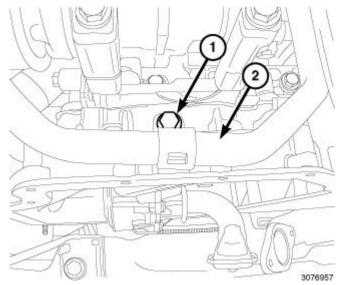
Coolant Tube & Bolt Courtesy of CHRYSLER GROUP, LLC
